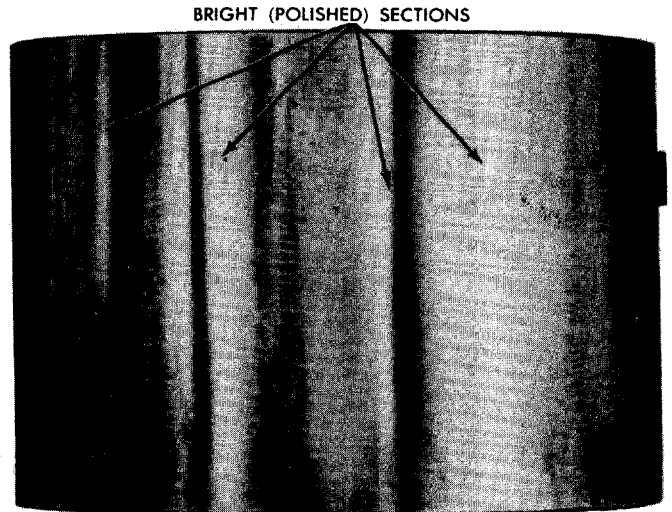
Bearing Showing Bright Spots Because of Improper Seating
